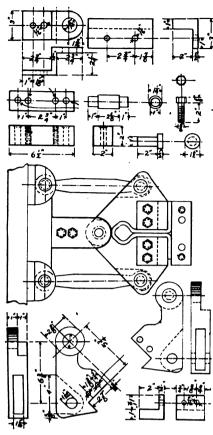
FOR BENDING BRAKE SHAFT BRACKETS
